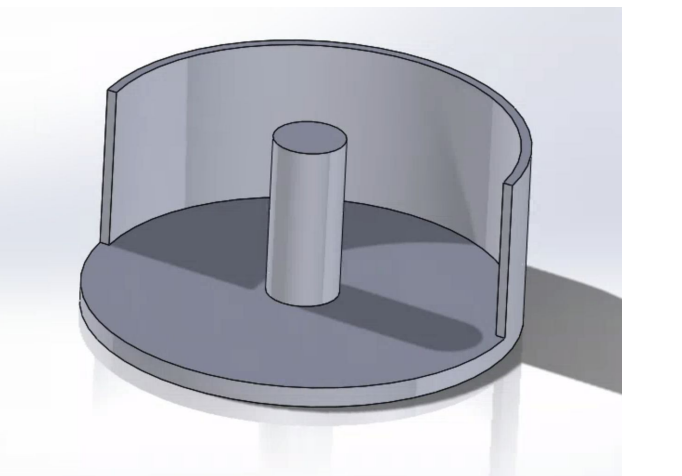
UHold stand Dimensions: Outer Diameter: 21 cm. Inner Diameter: 3.5 cm
